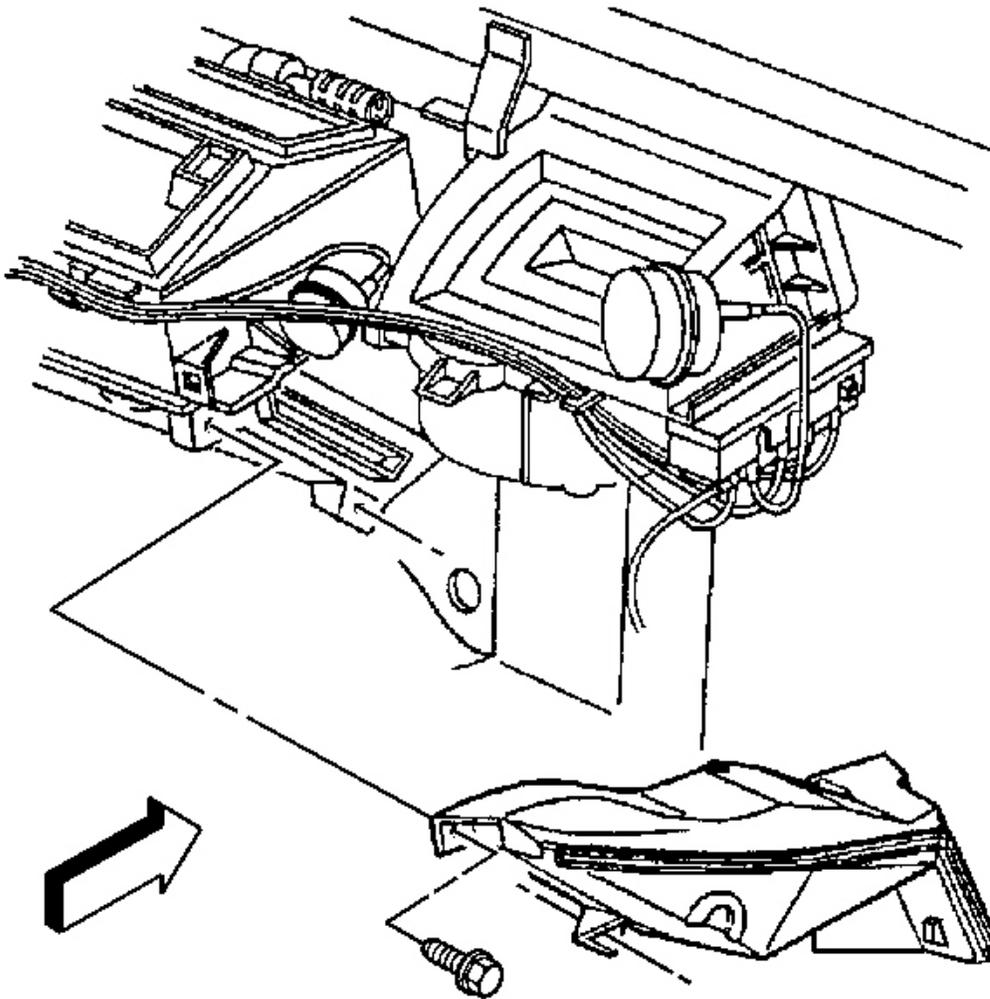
Floor Air Outlet Duct & Retaining Screws
